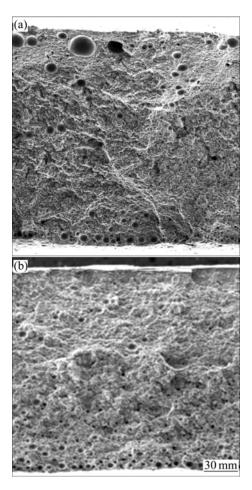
Comparison of tensile fractographs between conventional welded joint (a) and RE welded joint (b)
